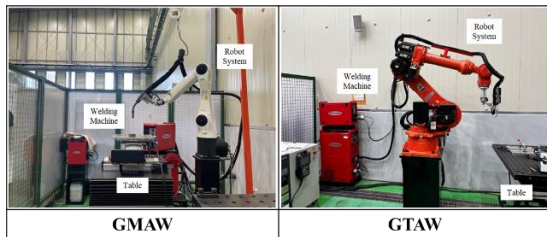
Photos of GMAW and GTAW Weld robotic system
